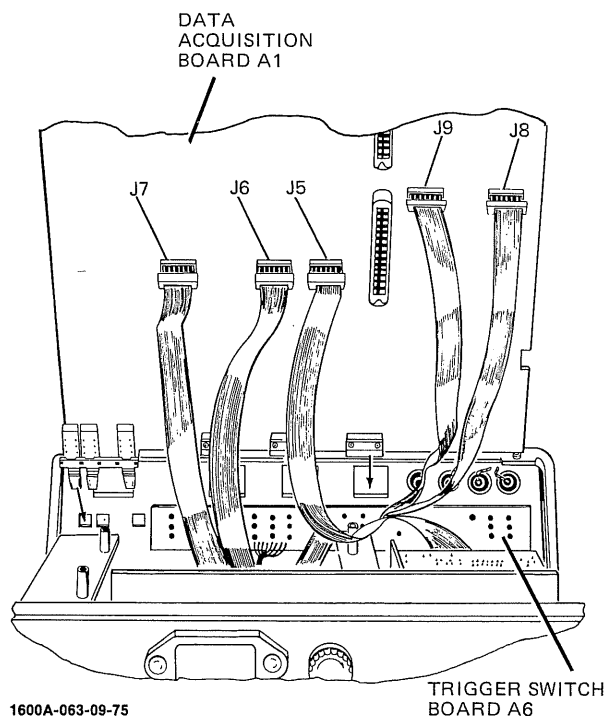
Data Acquisition A1/Trigger Switch A6 Board Removal
